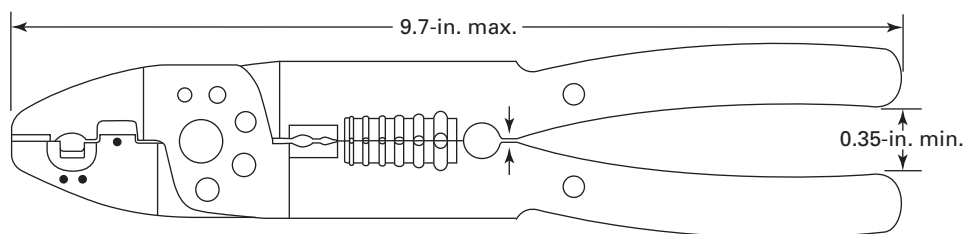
Type II, Class 4, Wire Cutter/Stripper, Small Frame, Strippers Forward of Pivot, Adjustable Size, With Spring and Lock Optional
